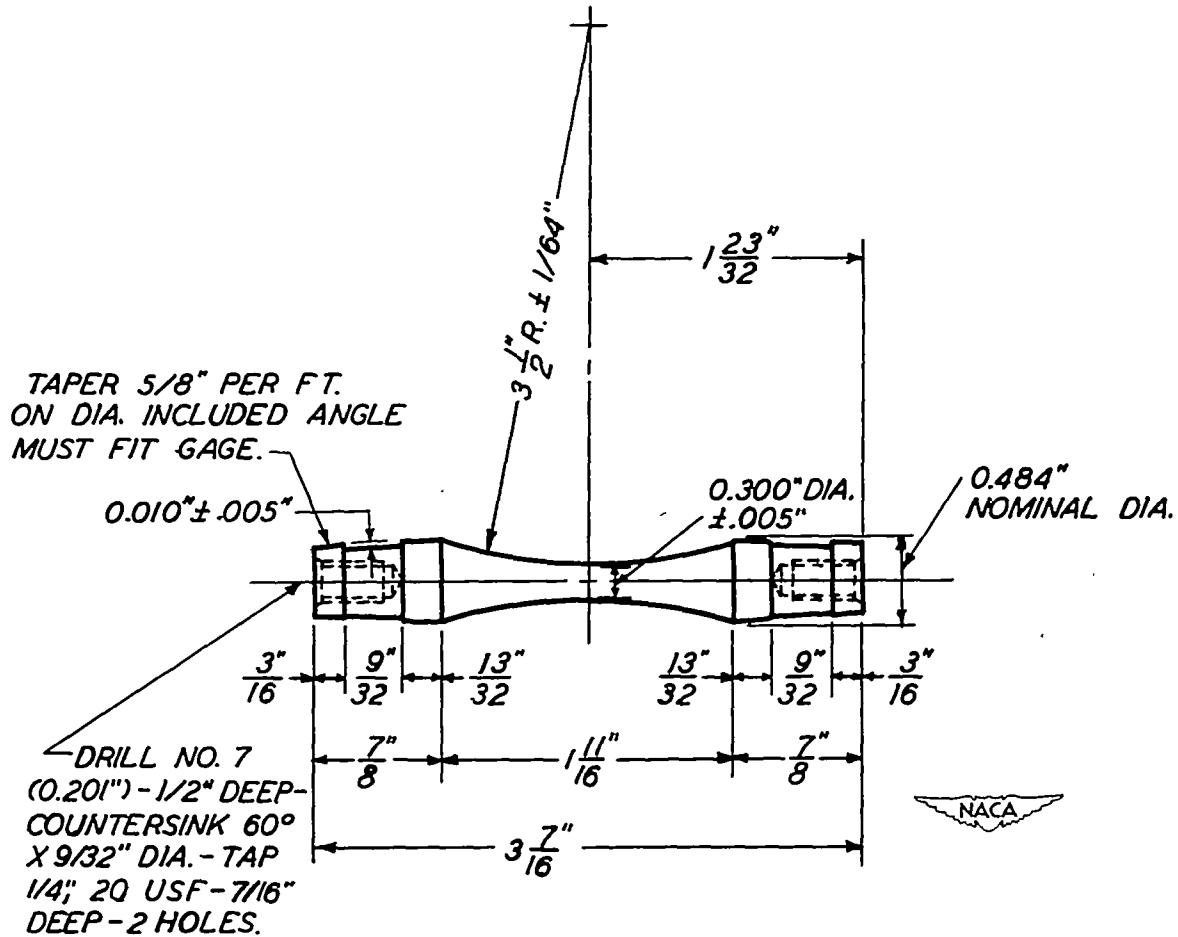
Rotating-cantilever fatigue test specimen. Nominal dimensions are shown;  $\pm 1/64$ -inch tolerance is allowed on all longitudinal dimensions.
